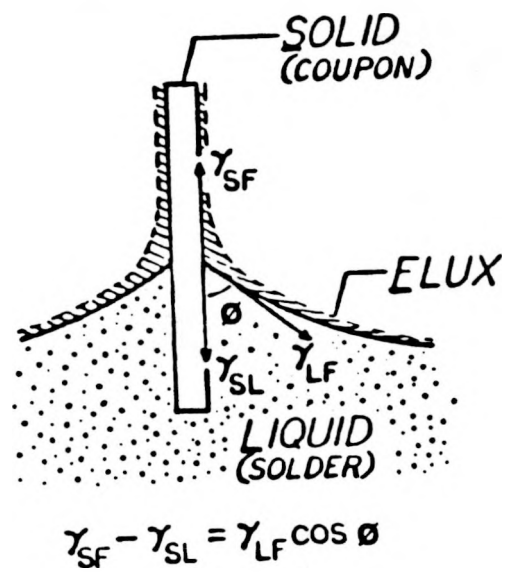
Schematic of the liquid solder, base metal, and flux surface tension equilibrium conditions for wetting of a vertical plate.
